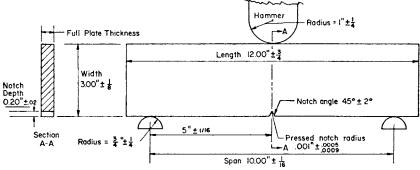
Drop-Weight Tear Test Specimens and Support Dimensions and Tolerances (for Specimens 1/8 to 3/4 in. in Thickness)
